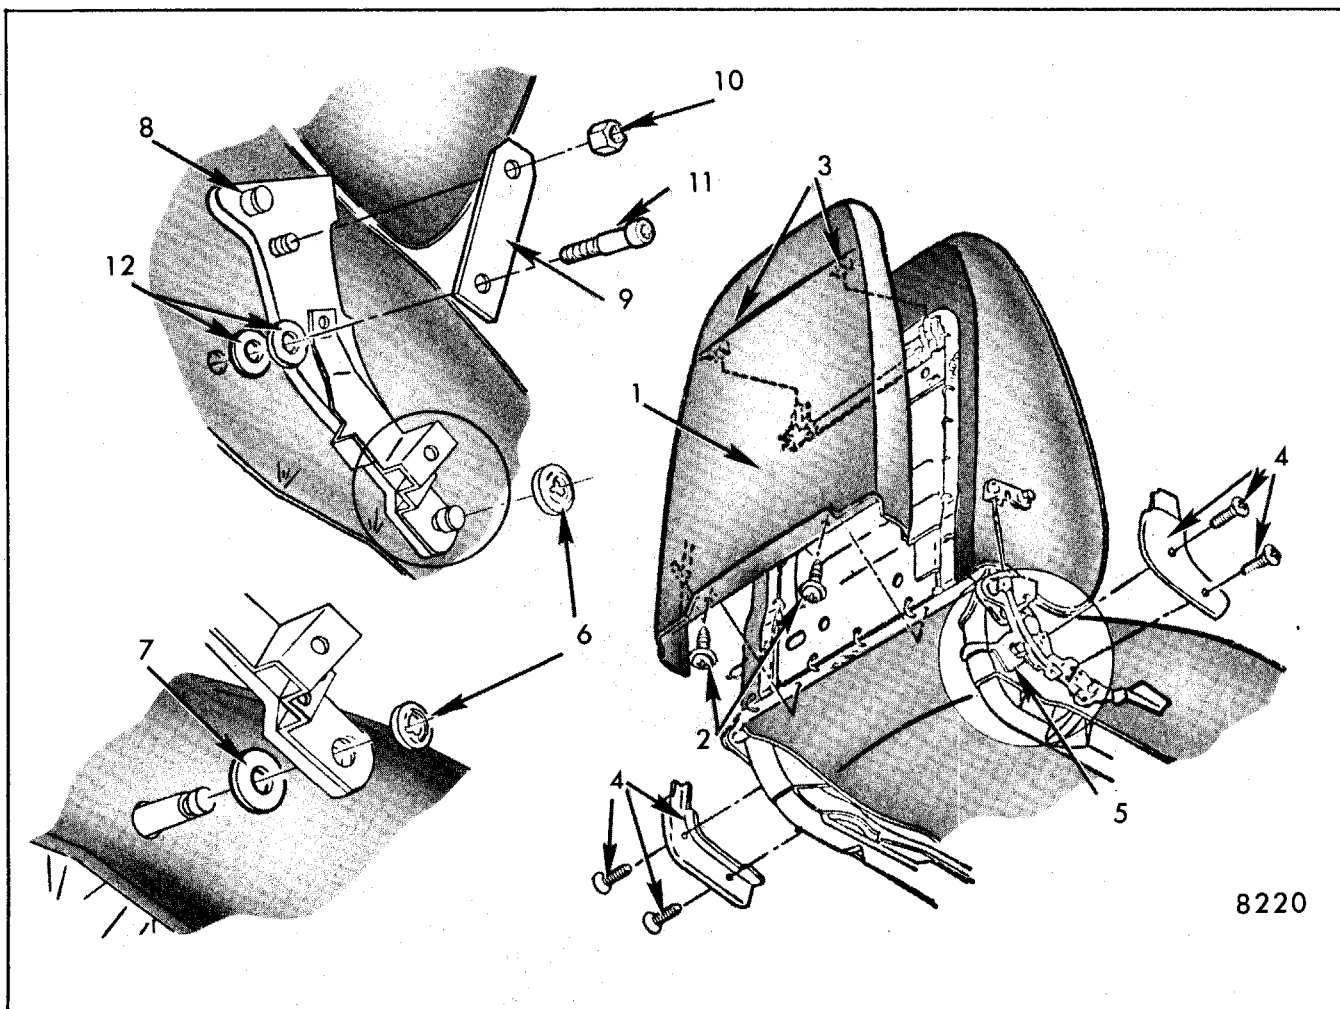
Custom Bucket Seat Back - Passenger Seat Shown
